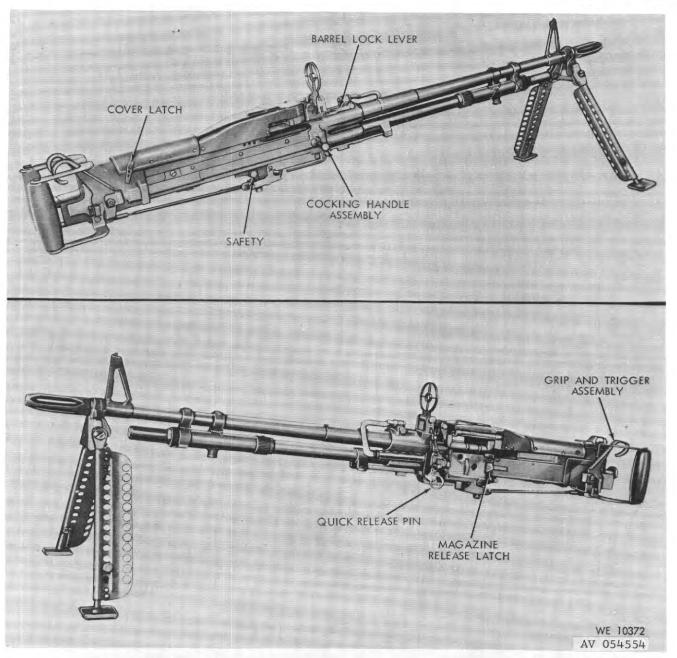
7.62 millimeter machine gun M60D - right rear and left front views
